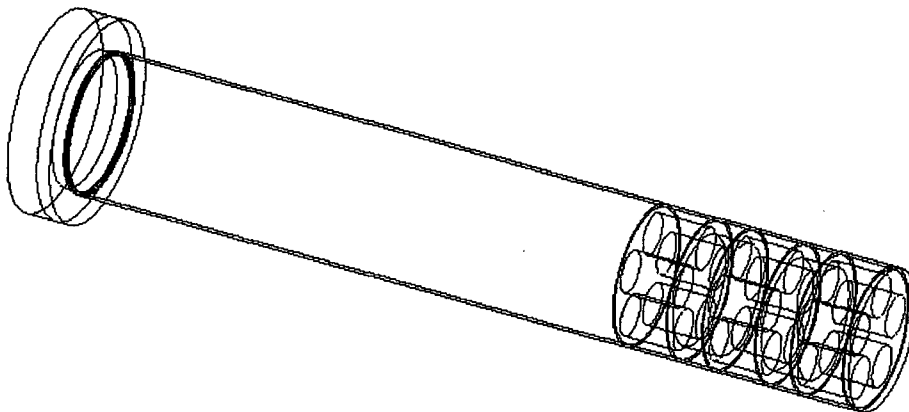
Containment vessel containing 4.25-in.-diam cylinders and 1.4-in.-thick 277-4 canned spacers.
